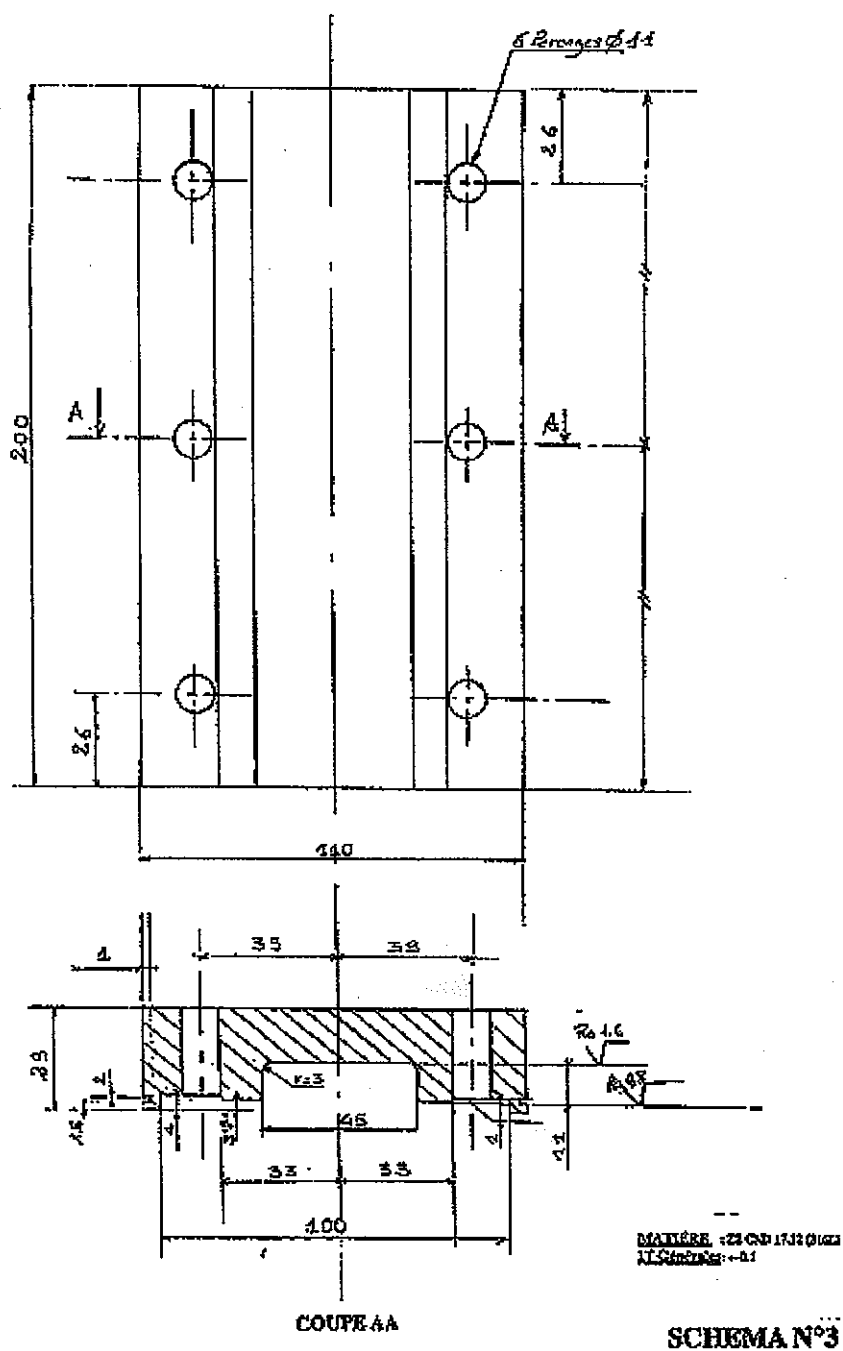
Plate of 316L steel (VIRGO) with weldment, details of holder geometry
